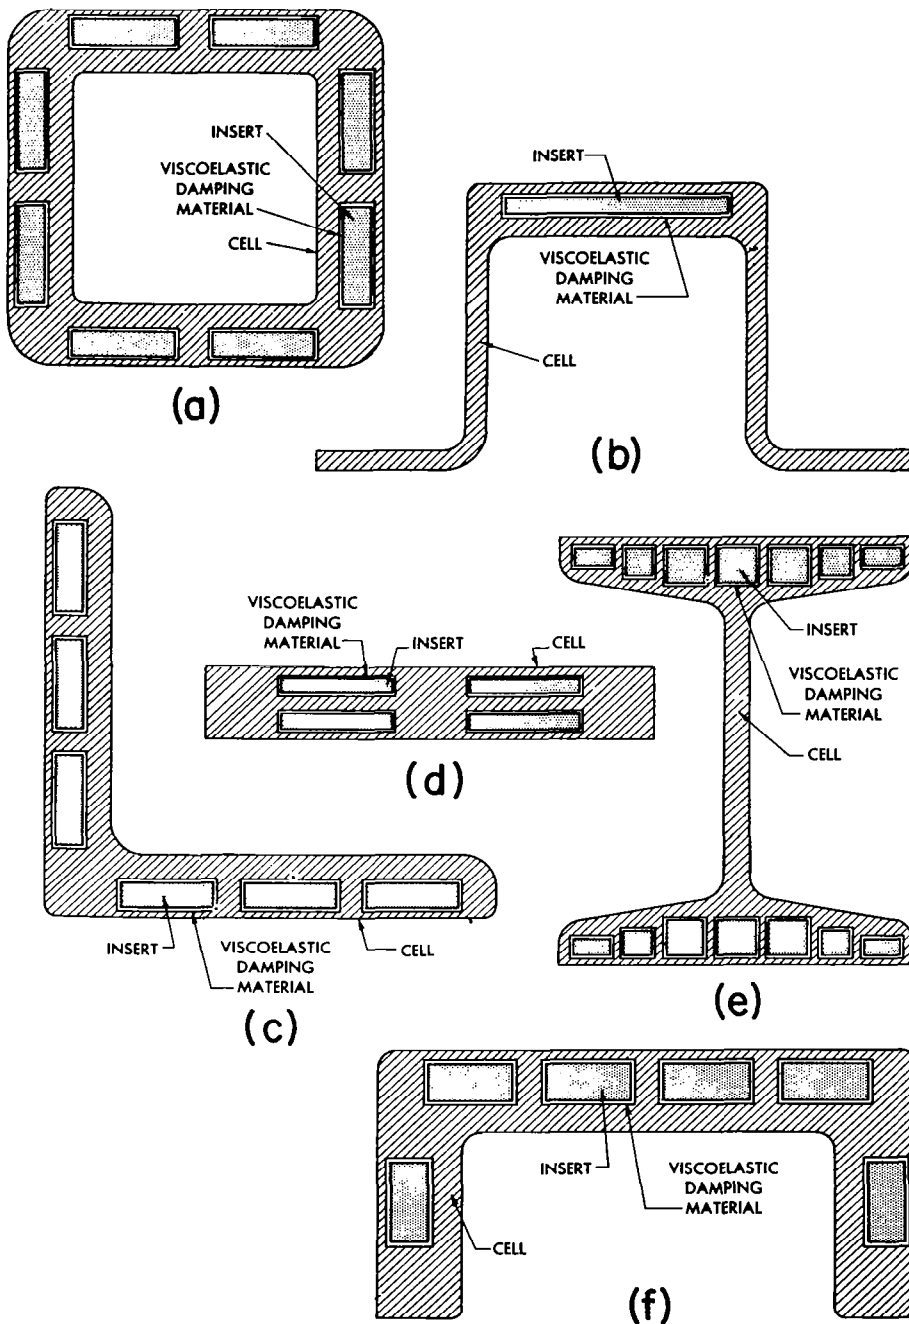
Cross-sections of viscoelastic shear-damped composite structural beams of cell-insert construction: (a) square tube, (b) hat-section, (c) angle, (d) flat bar, (e) I-section and (f) channel designs
